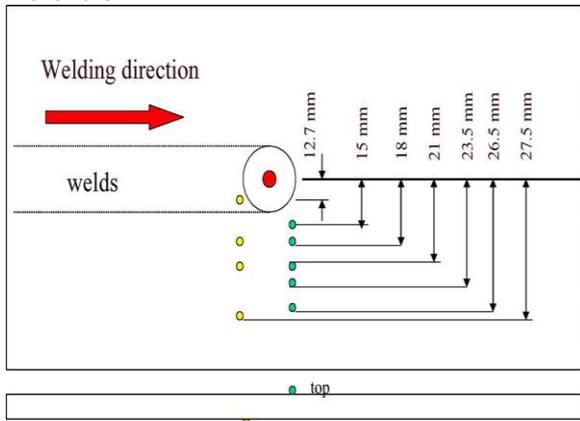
Location of thermocouples in friction stir welding (for the case of 300 rpm tool rotational speed). X.K.Zhu et.al. 2004
